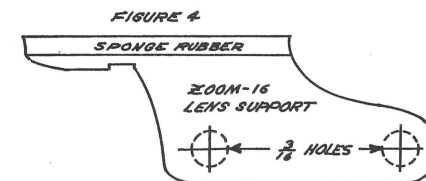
Detail of support for the Zoomar lens which fits on the two matte box rods extending from front of camera. This is companion piece to prism viewer, is necessary to hold Zoomar rigid.
